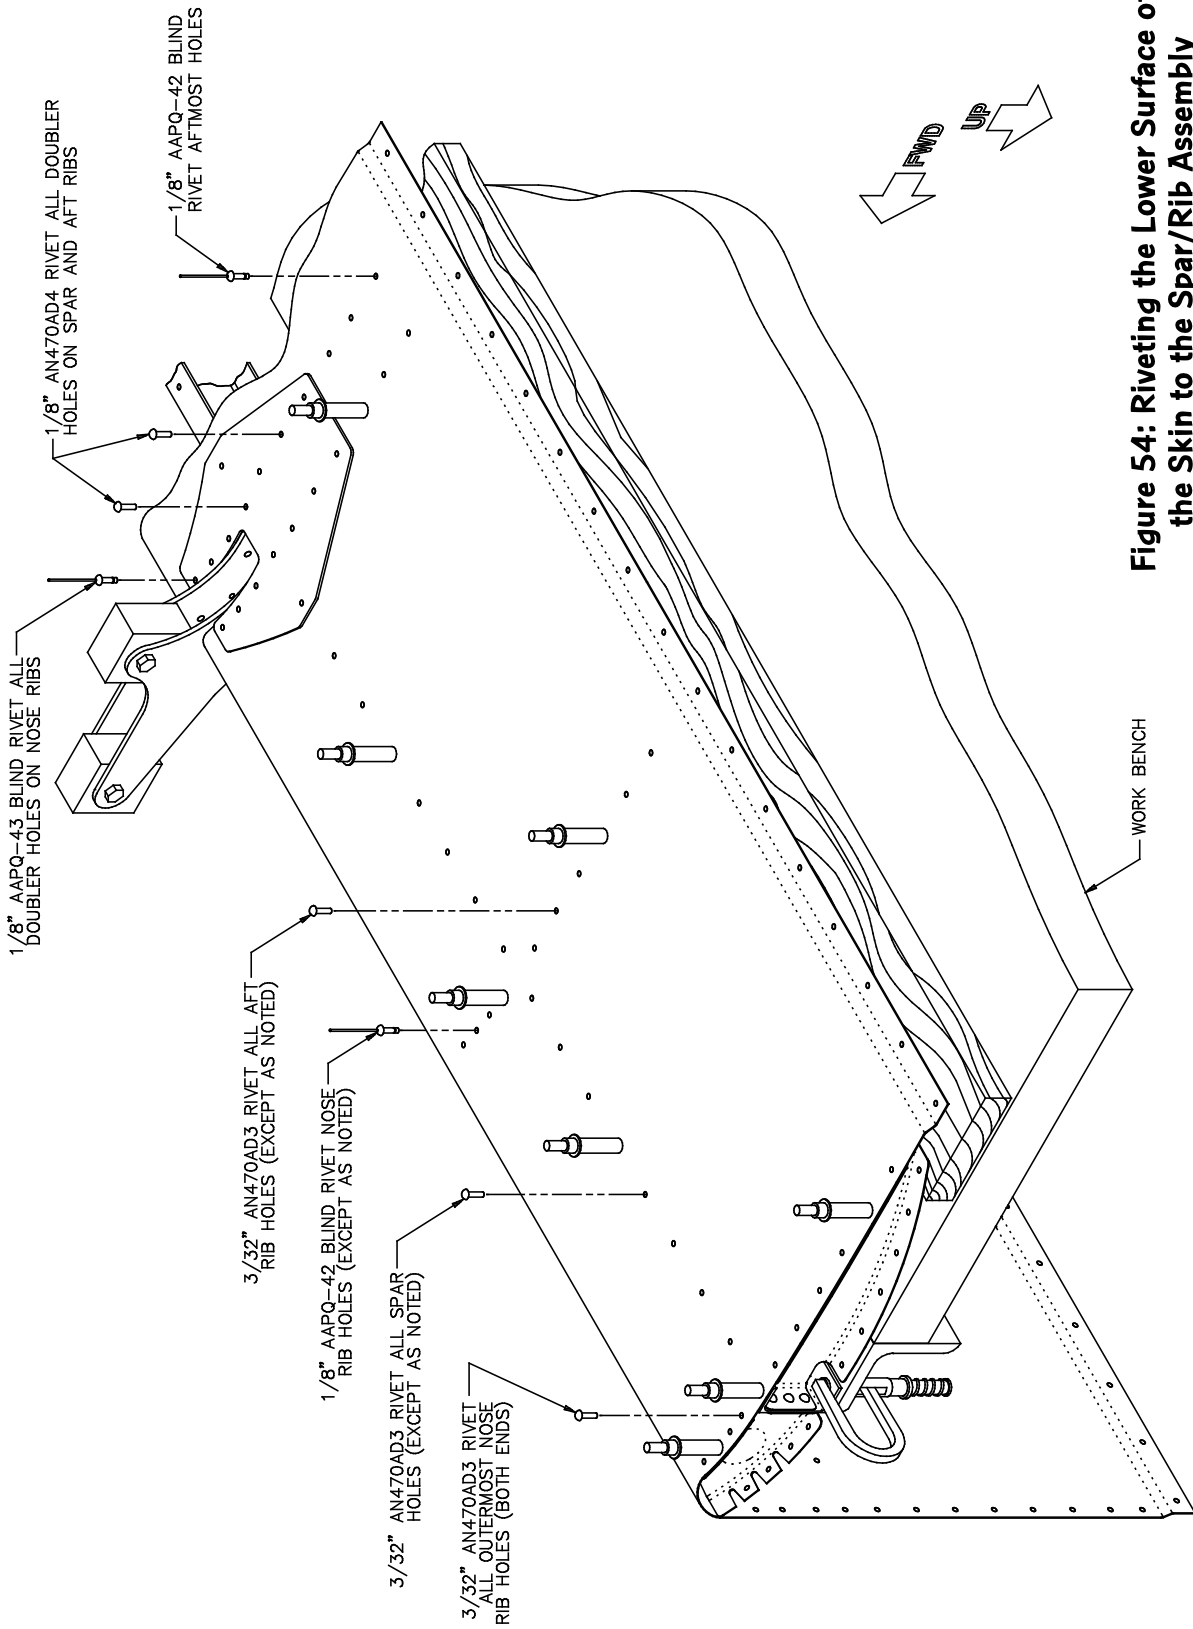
Riveting the Lower Surface of the Spar/Rib Assembly
